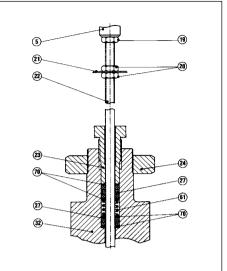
Stuffing box assembly with graphite rings (for "I" valves only)
